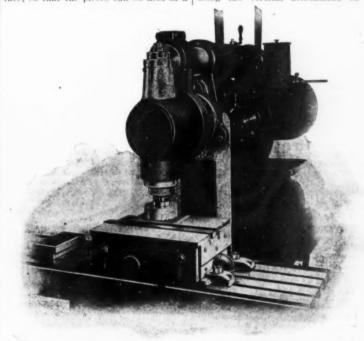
FINISHING THE PIECES TO EXACT SIZE ON A No. 3 PLAIN CINCINNATI MILLER.
